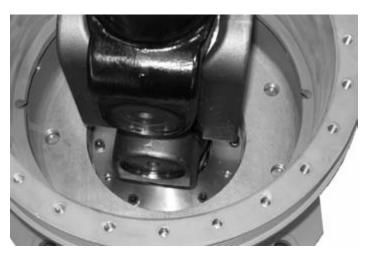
Install Four Capscrews to Retain Sleeve, Turn Over and Measure End Play
